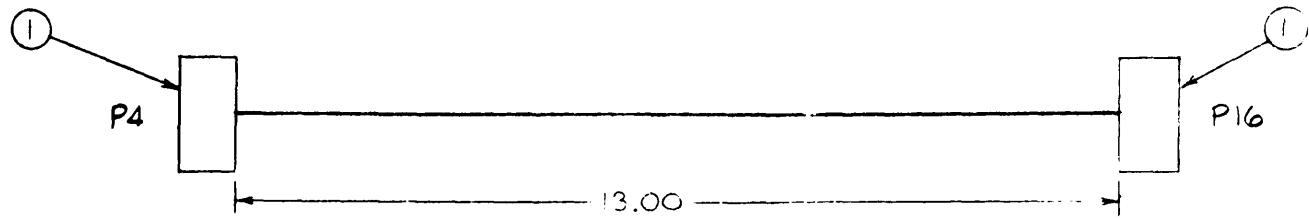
Set Special Relay Assembly (Class 1, Mode II) Sets, Wiring Harness (Sheet 4 of 5)
